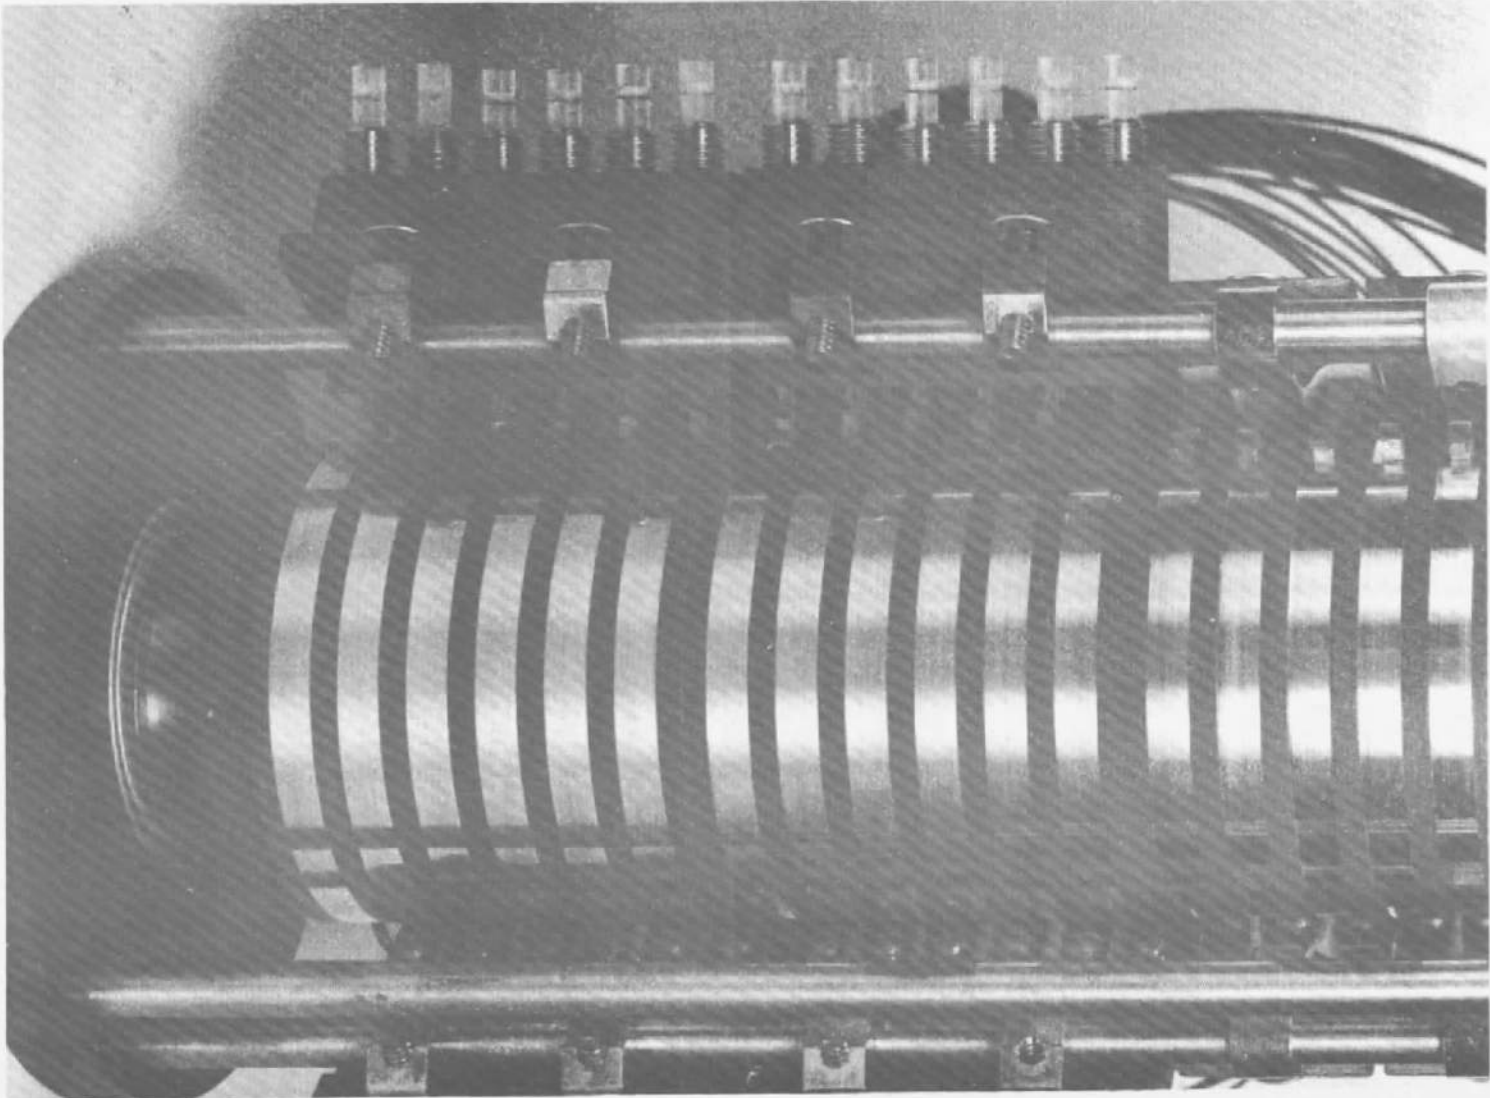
Slip Ring Assembly 4 Before Testing, Showing Detail of Modified Brush Holder
